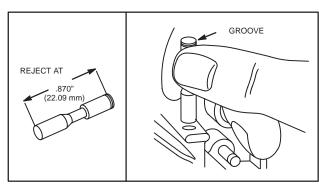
CHECKING BREAKER POINT PLUNGER
